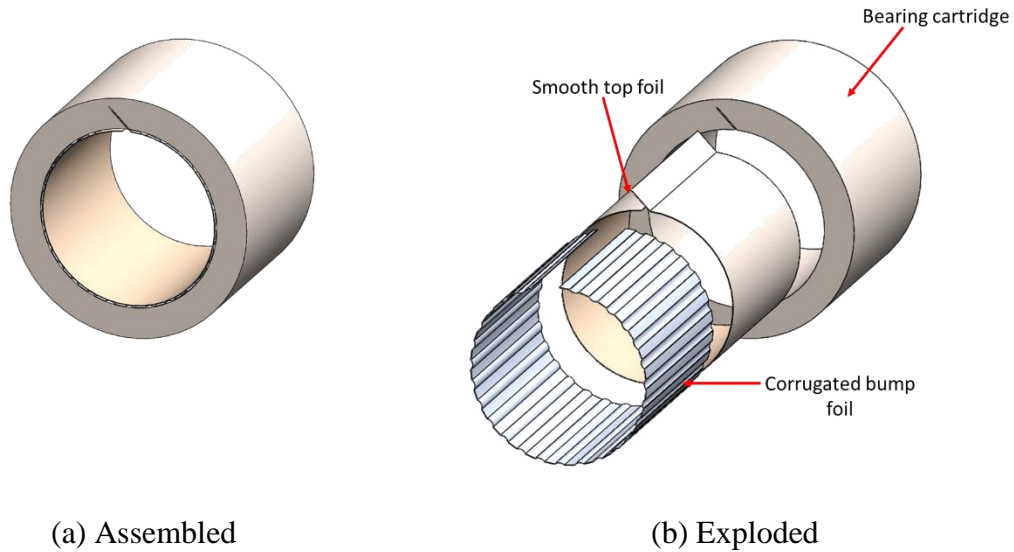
Schematic views of a Generation I bump-type foil journal bearing showing both (a) an assembled view and (b) an exploded view, detailing the bearing components.
